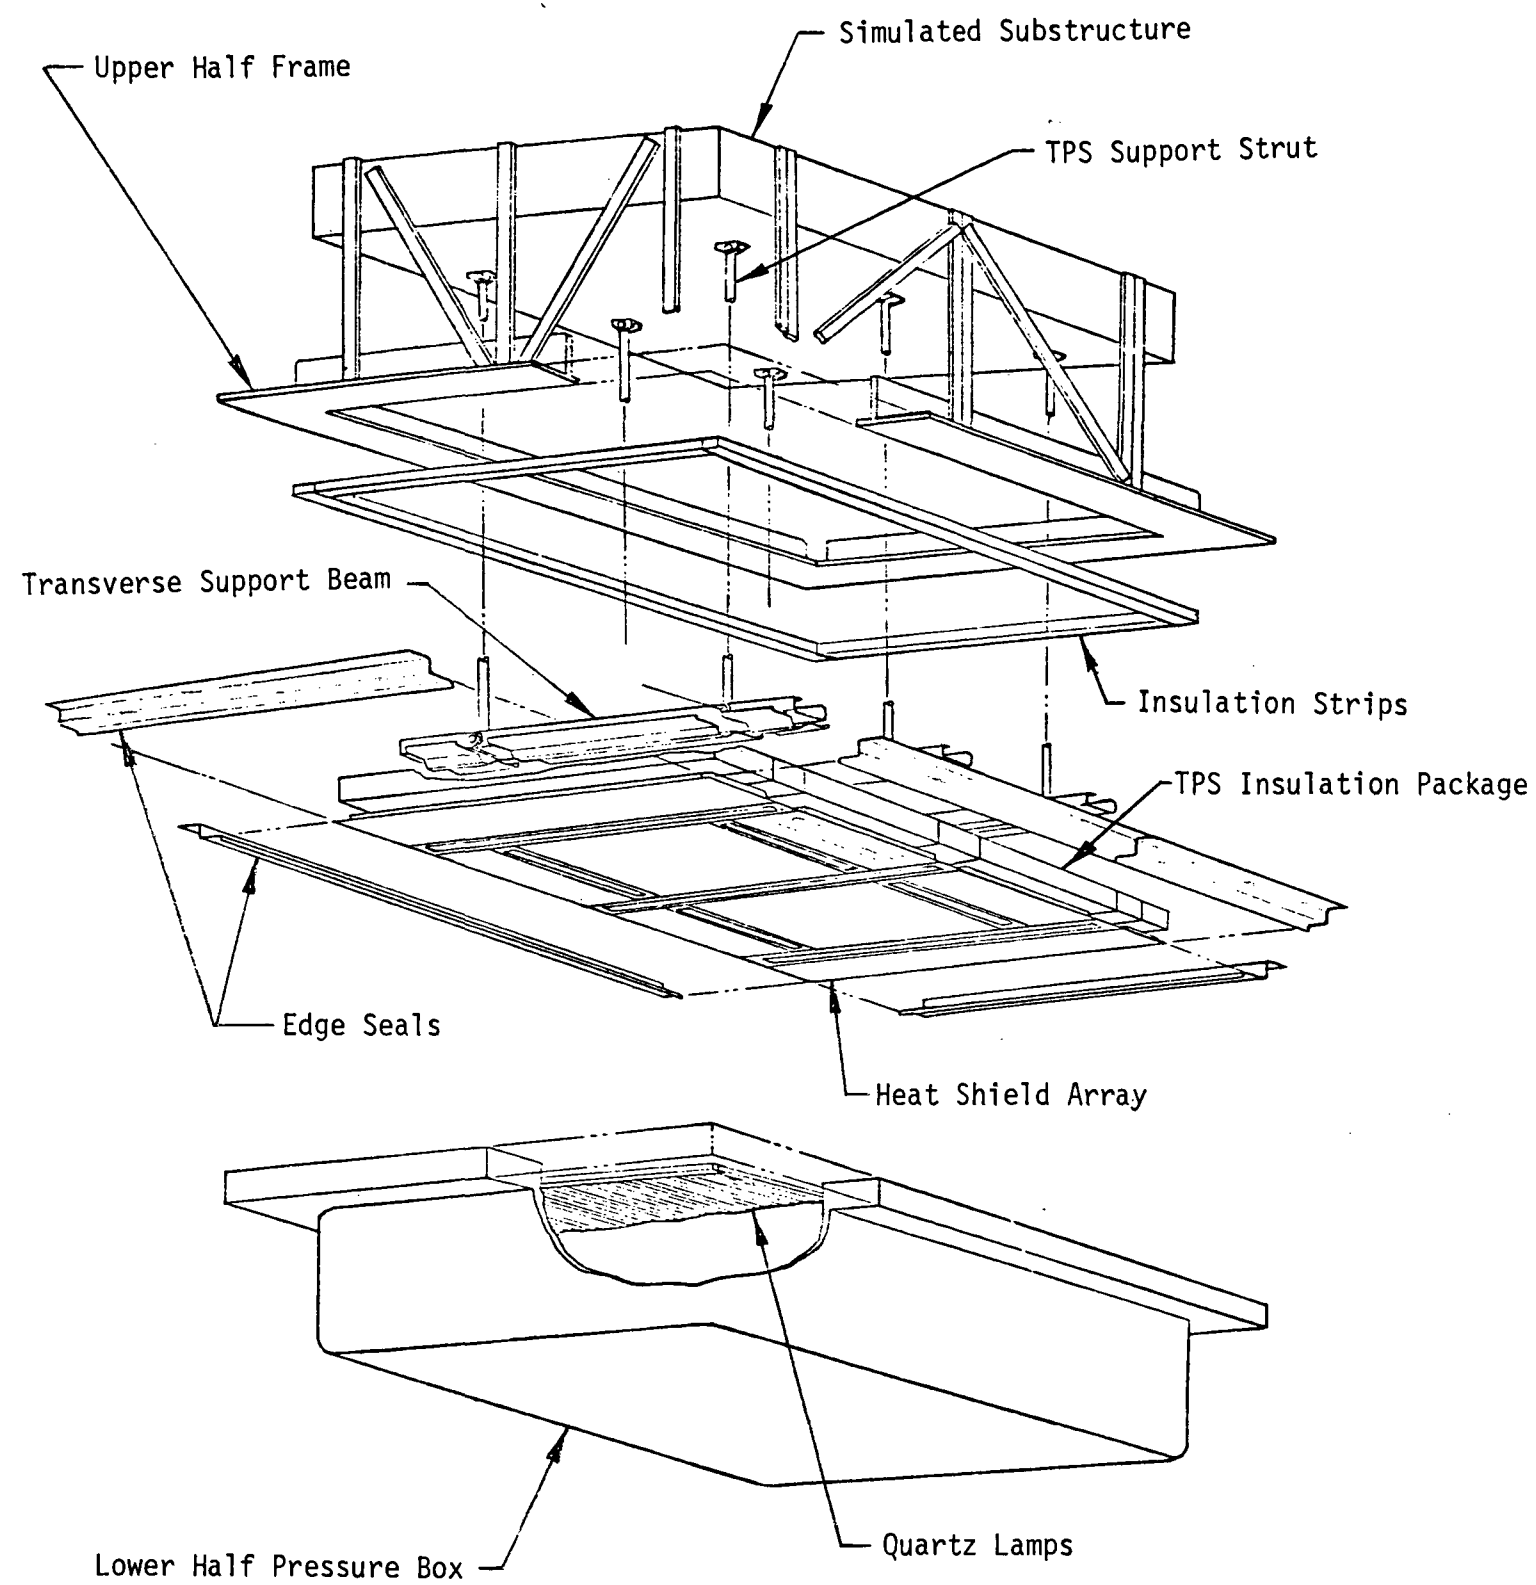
Lower Half of Contractor TPS Test Fixture
